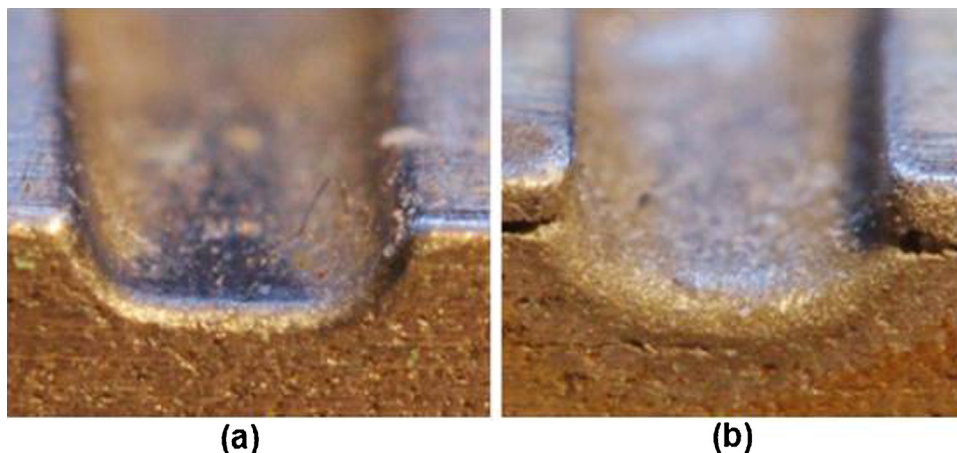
A 3D view of the slot machined using (a) square and (b) cylindrical tools.
